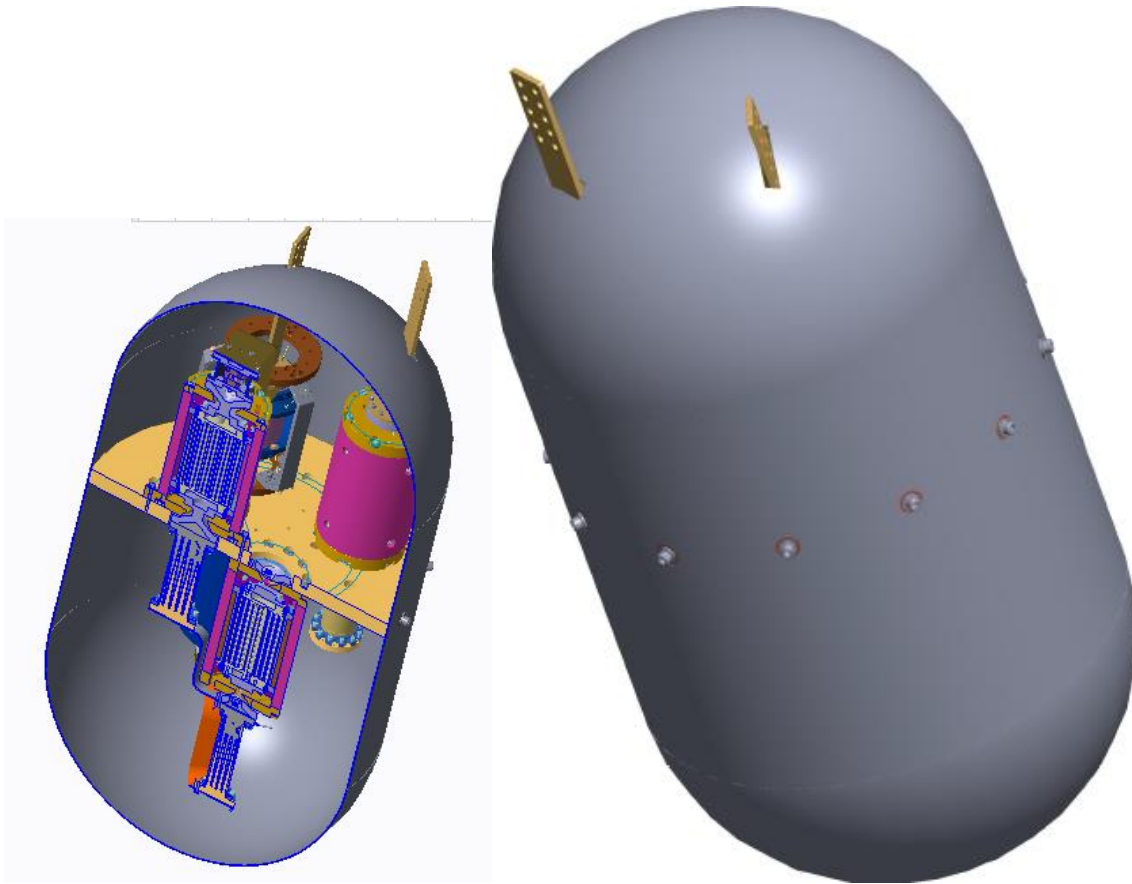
CAD drawing of a high cooling power sub-Kelvin cooler using the CADR concept. The basic dimensions are 44 cm long x 23 cm wide. The location of the component shown in the cutaway is flexible and may be reconfigured as needed.
